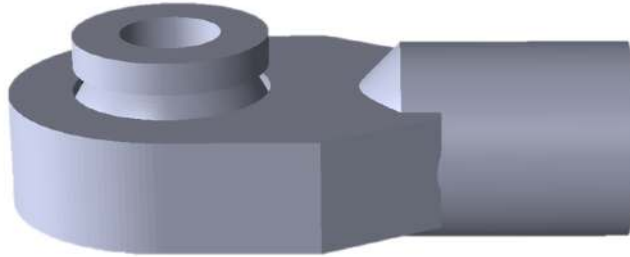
Single piece track rod end designed in Solidworks. Printed at 0.2mm layer height, PLA, 7mm retraction distance, horizontal orientation with raft and minimal supports. The distance between the ball joint and housing is 0.3mm with two connecting spurs which erode away during the first few uses.
